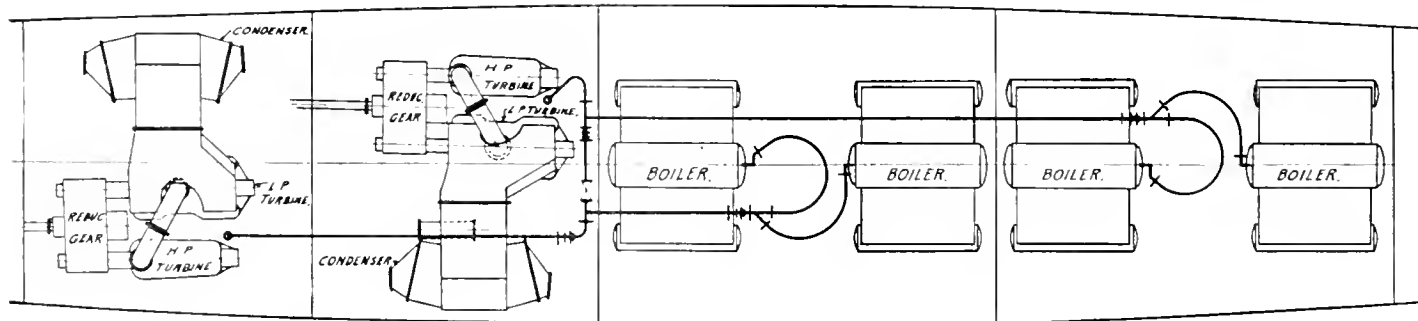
DESTROYERS, DIAGRAMMATIC PLAN OF TURBINE DRIVE WITH REDUCTION GEAR SHOWING THE ARRANGEMENT OF MACHINERY
